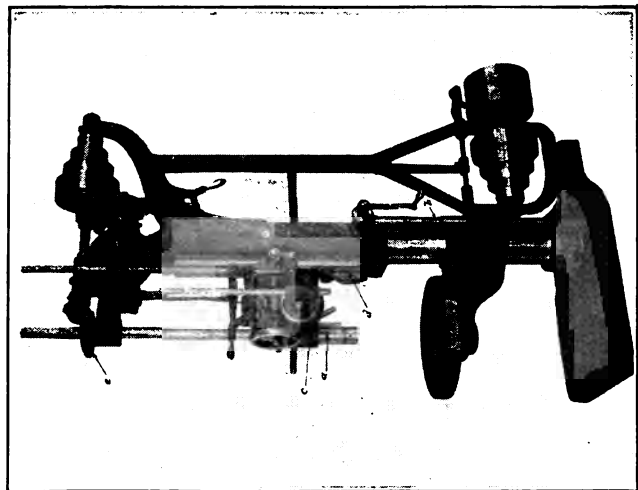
STANDARD UPRIGHT DRILL PRESS
